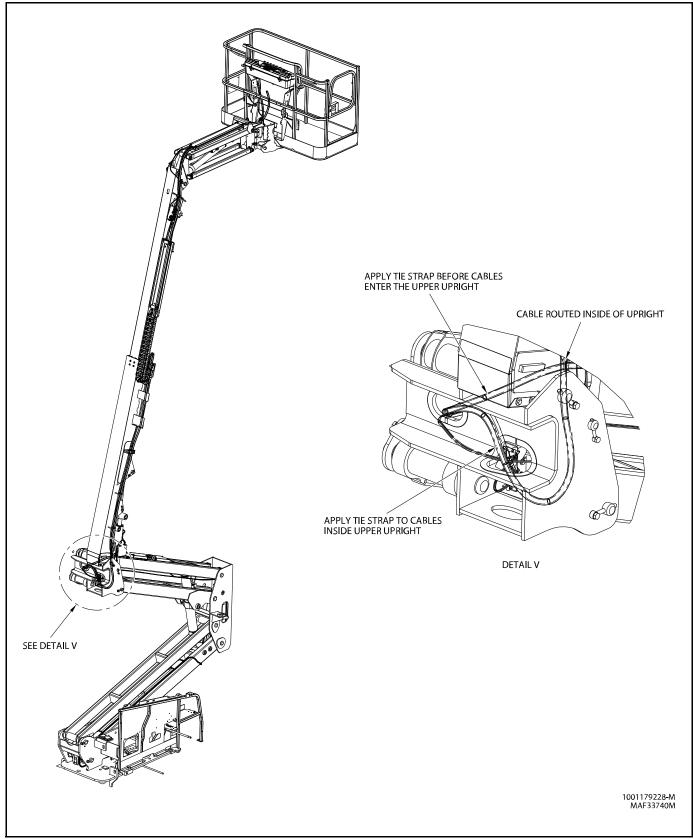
Cables and Clamps Installation - Sheet 7 of 8
